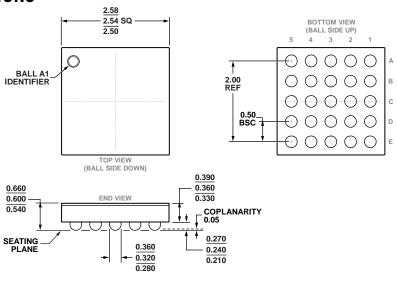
25-Ball Wafer Level Chip Scale Package [WLCSP] (CB-25-7)
